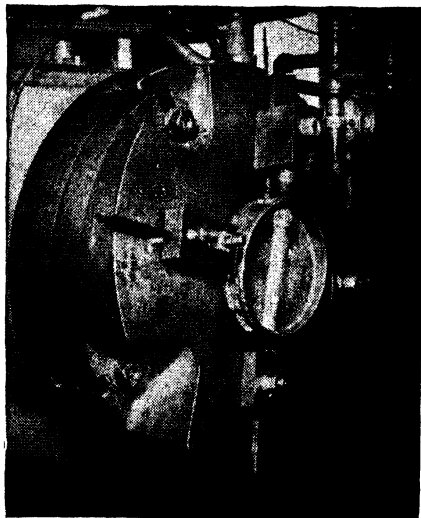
Special lathe faceplate for repairing gate-valve disks. (Courtesy of Jenkins Bros.)
